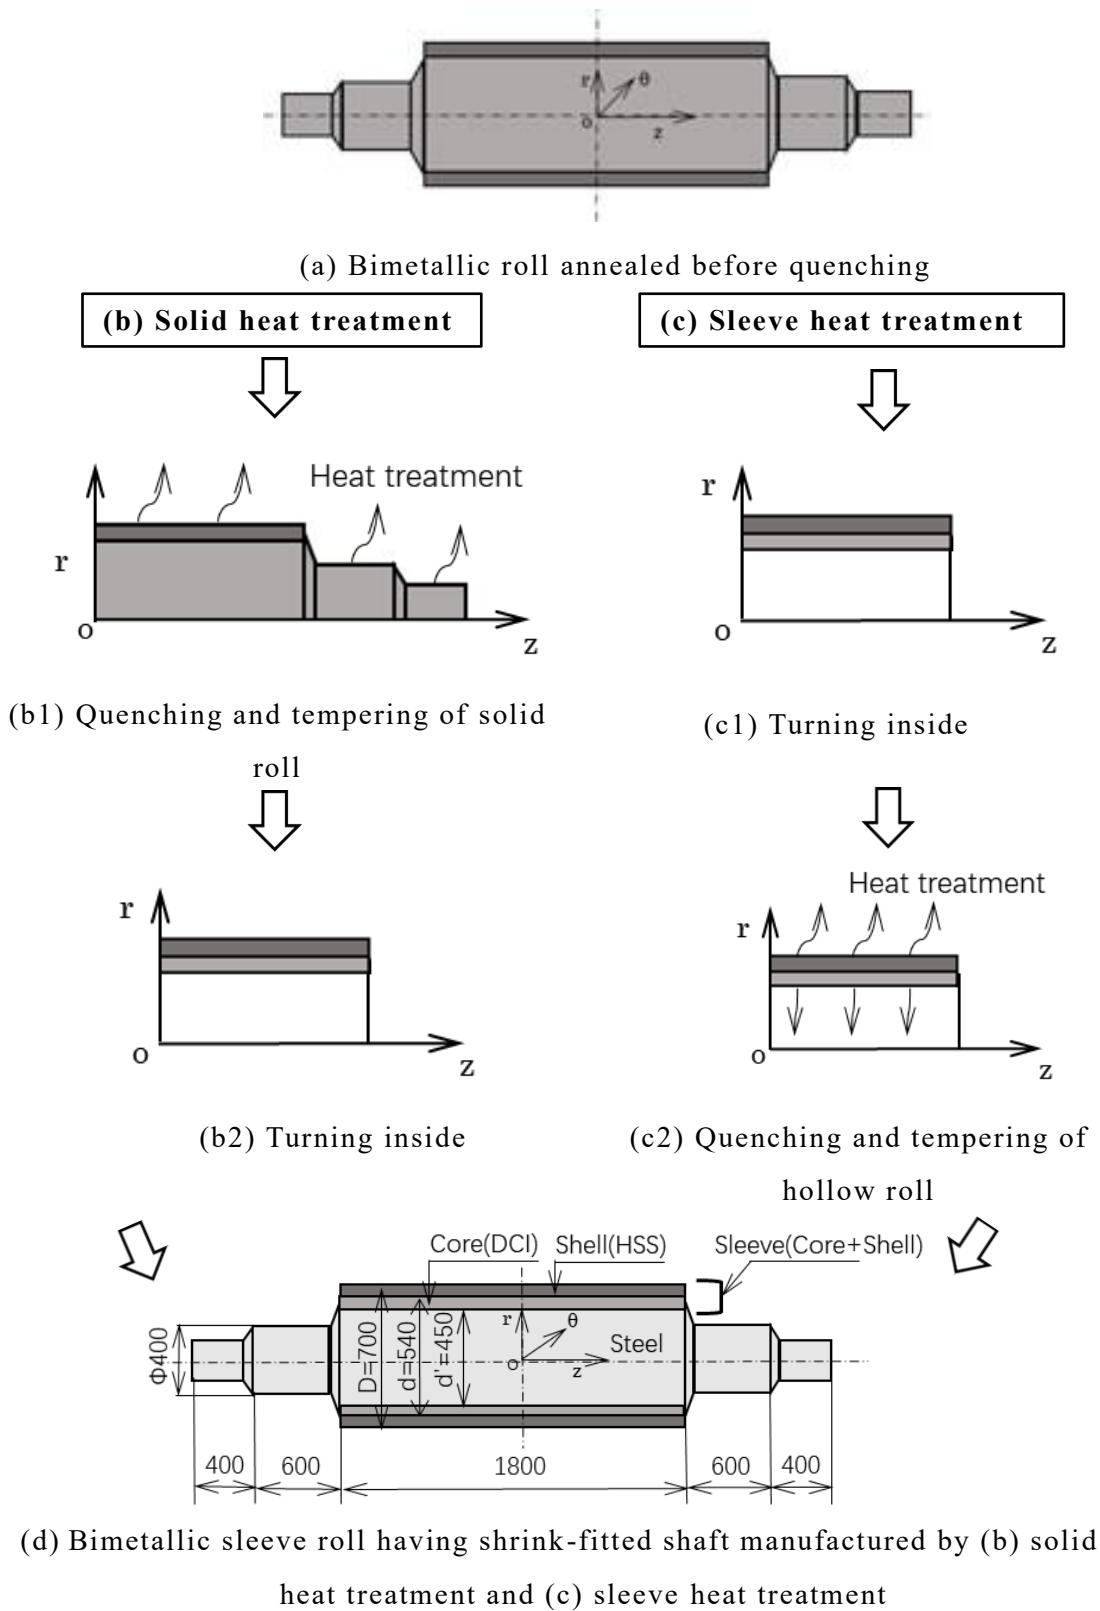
Solid roll and sleeve roll dimensions (mm)
